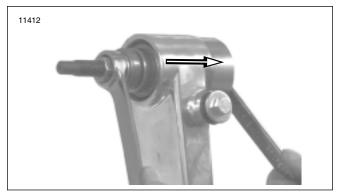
Install Left Side Swingarm Bearing (typical)
